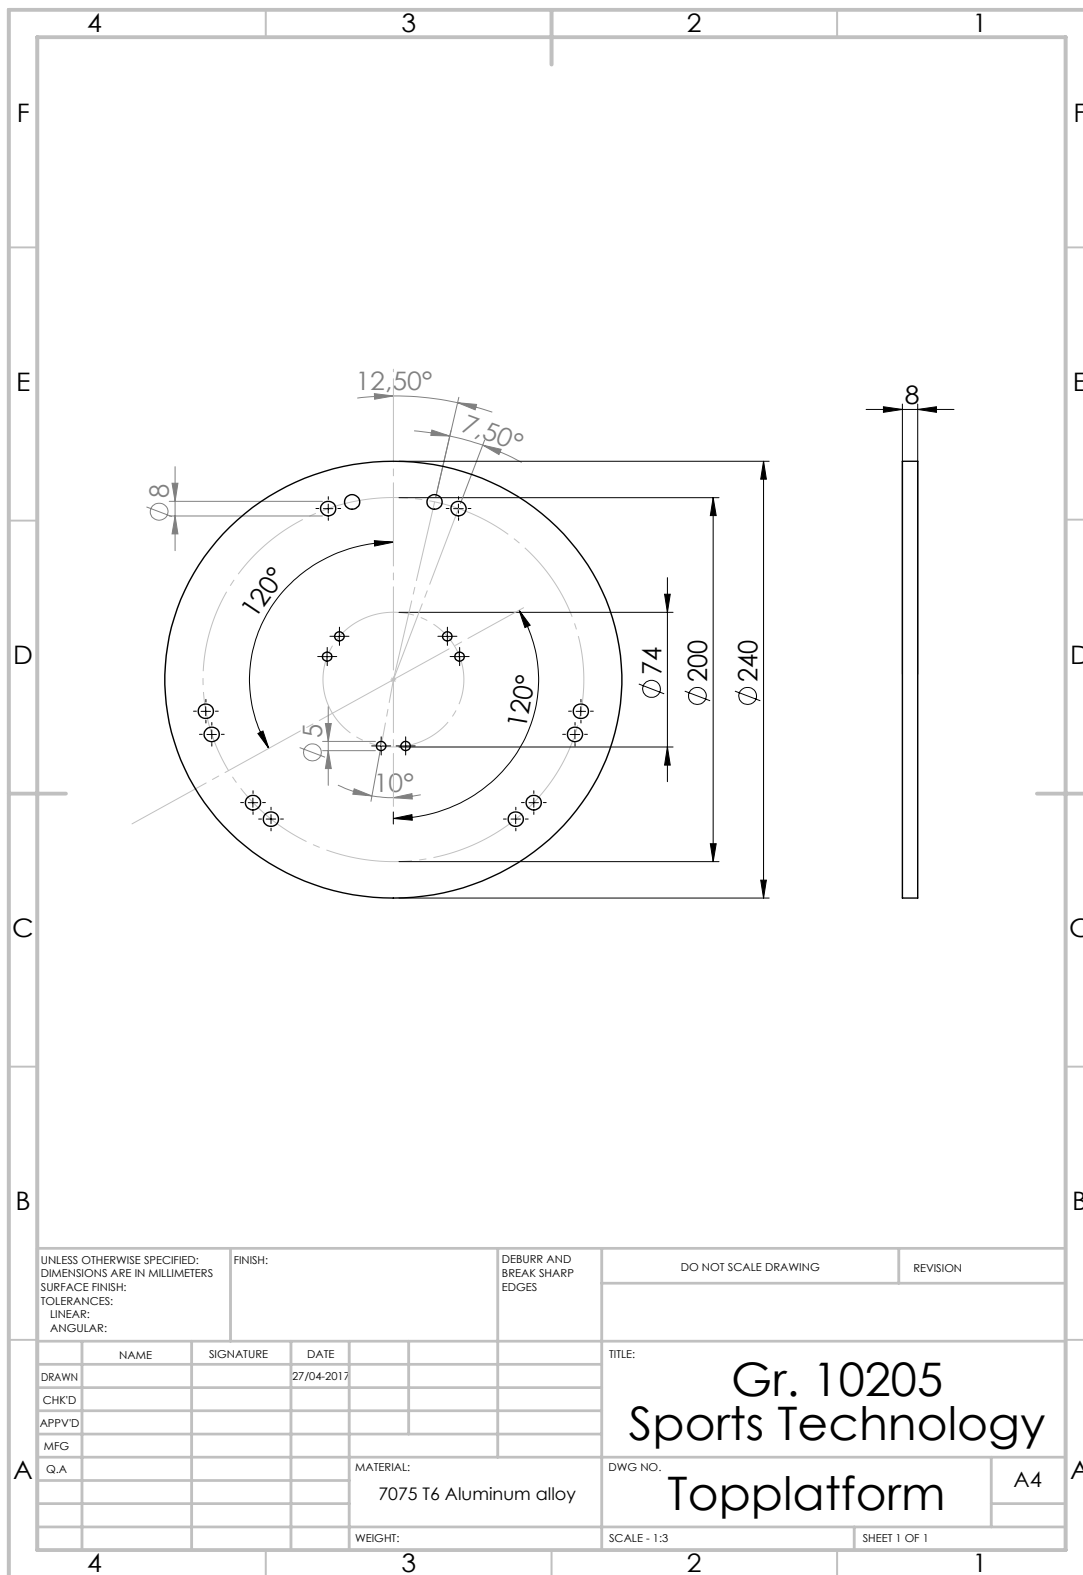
The technical drawing of the top platform. The dimensions given are in mm and degrees.
